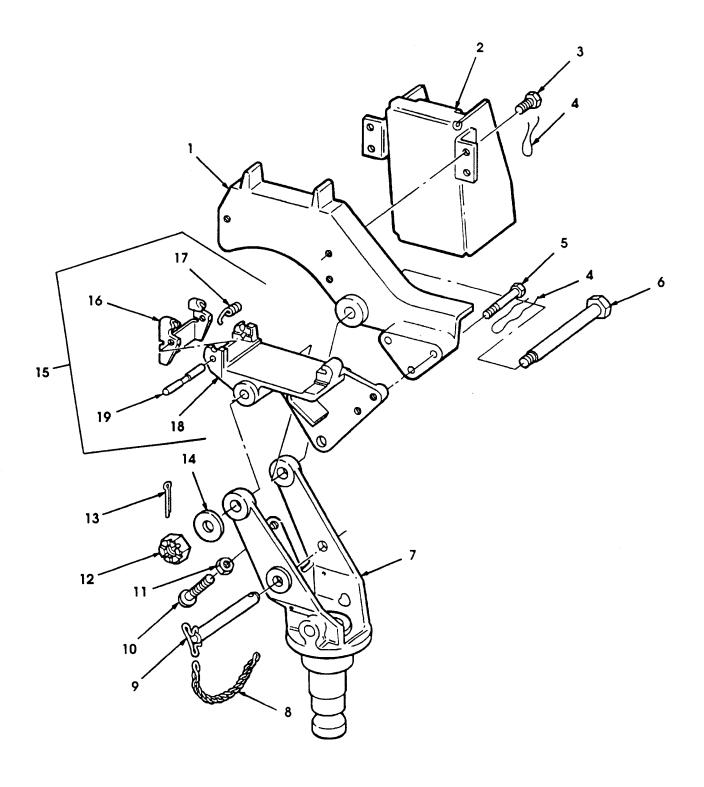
Mount, Machine Gun, M142 10900945 and Platform Assembly 10900947.
